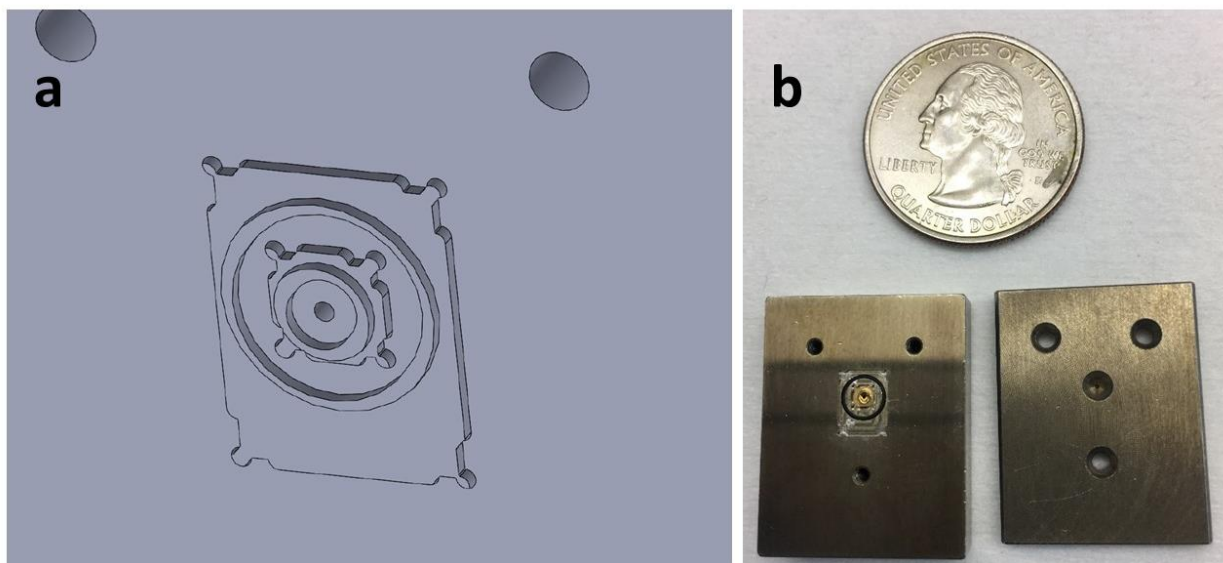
Indium sealing press chuck. (a) Close up of the recessed grooves for the chips and o-rings. b) Chuck machined out of steel - quarter for scale.
